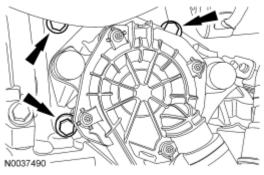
Locating AIR Pump Bolts Courtesy of FORD MOTOR CO.
